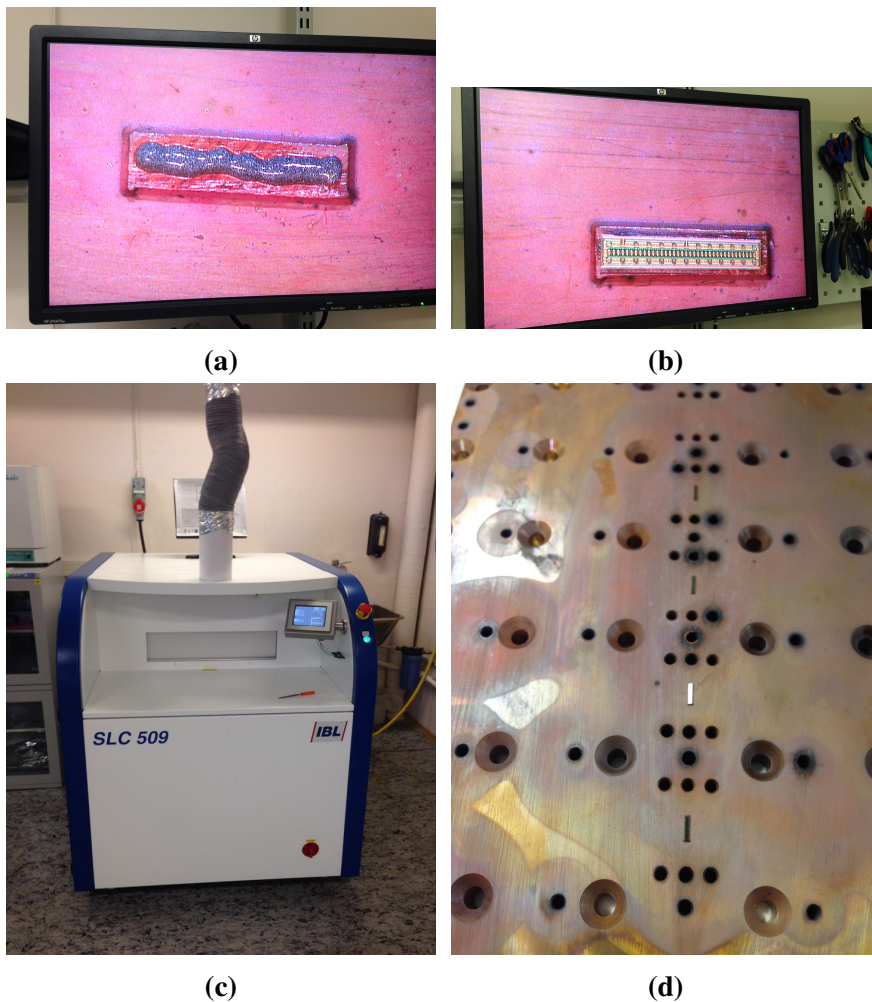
The die attach procedure step-by-step: (a): solder paste placed on the Cu plate, (b): transistor placed on top of solder paste, (c): solder heated in soldering machine, (d): finished result.
